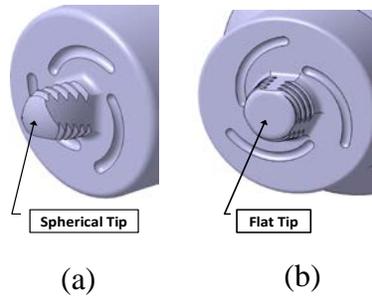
Phase II tool designs had a wiper shoulder design [42] with a) a threaded probe with twisted flats and b) a threaded probe with straight flats
